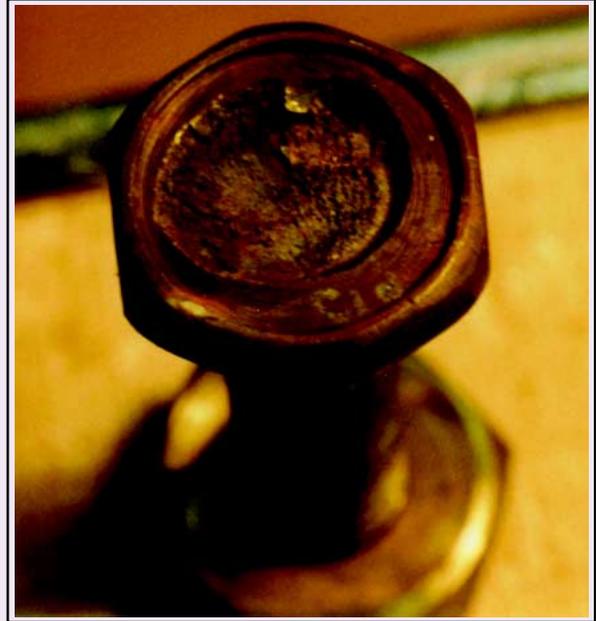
As-received fractured bolt (P-3; P, mausoleum located in Pennsylvania)
